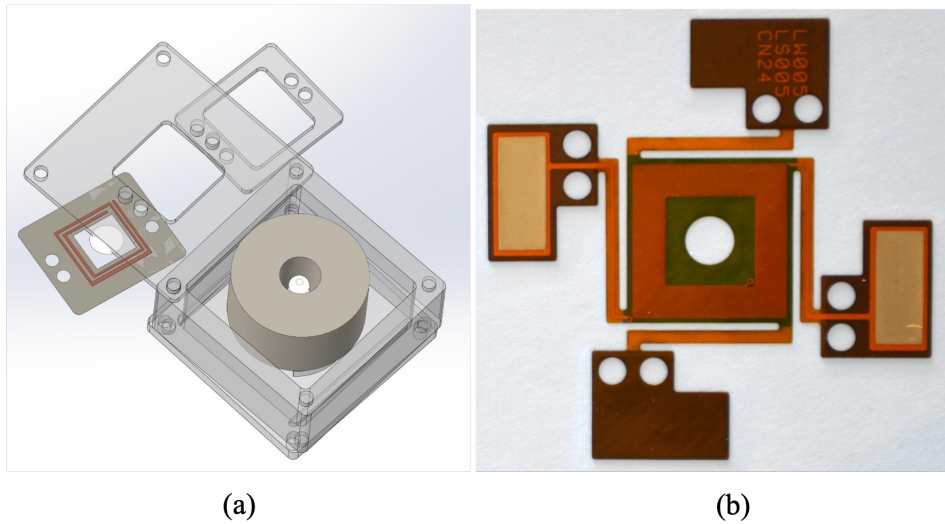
(a) A schematic view of the whole system, ring shape permanent magnet is installed in a 3D printed holder, while the cover is mounted with the flexible actuator, (b) the fabricated device, with Cu coil on patterned polyimide substrate.
